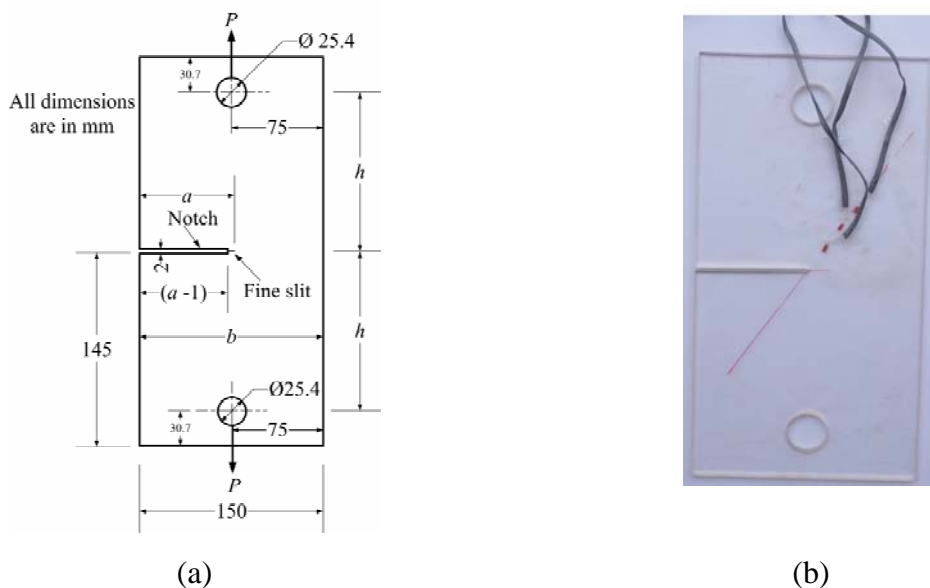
(a) schematic of edge cracked specimen (b) actual specimen
